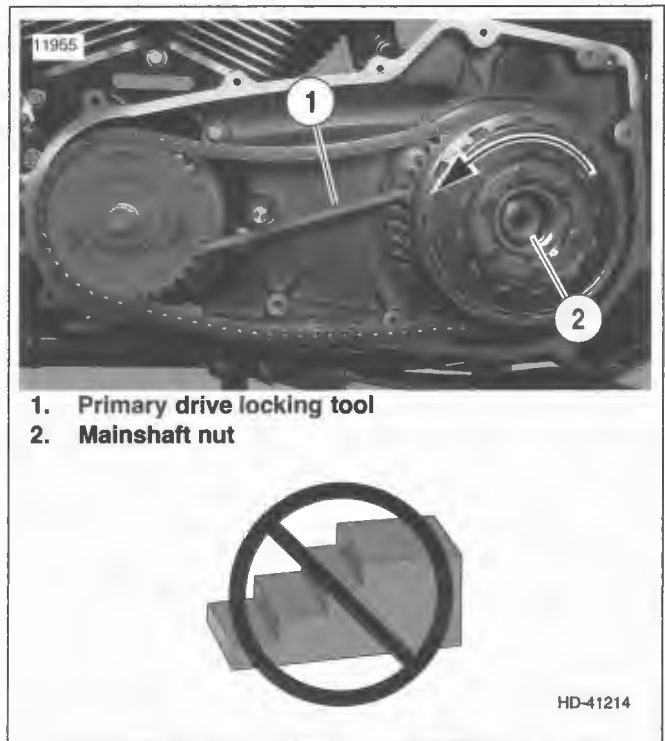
Installing Clutch Hub Mainshaft Nut
